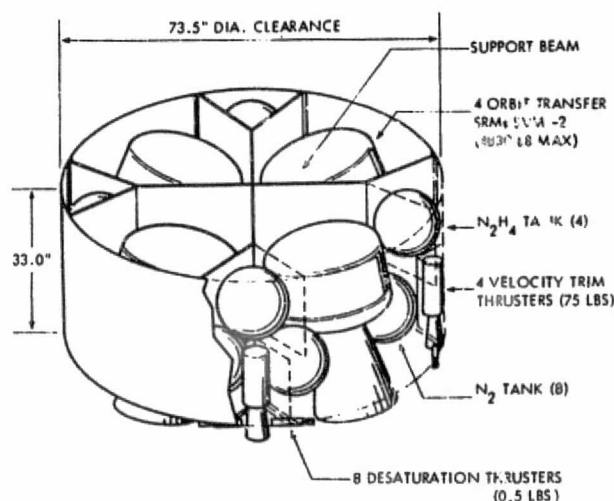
Solid Rocket Motor Orbit Transfer System
